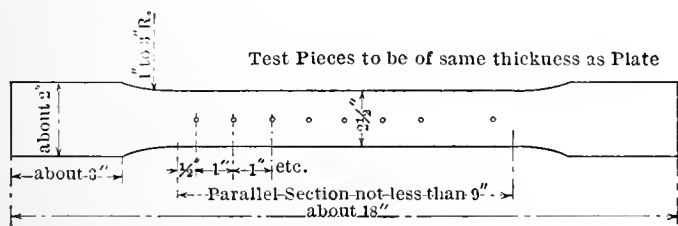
STANDARD TEST PIECE FOR BOILER PLATE.
